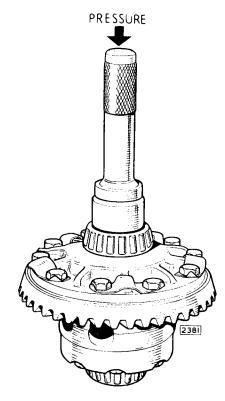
Replacing the differential bearing using Churchill Tool No. 550 with adaptor SL.550—1.
